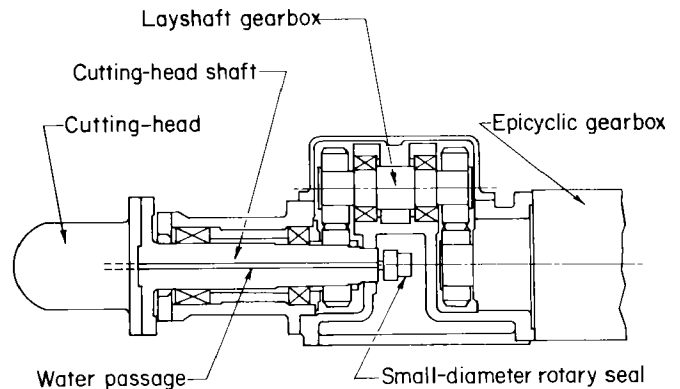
Section through layshaft gearbox showing location of U-ring seal.
